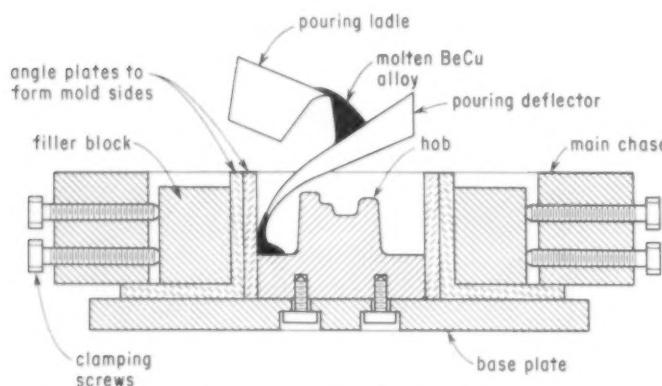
Cutaway view of the hobbing chamber, showing technique to be used in pouring the mold. A deflector plate is used to keep molten metal from impinging directly on the hob.
